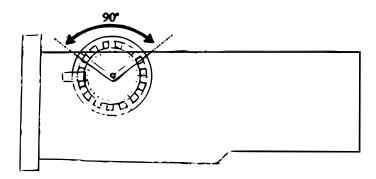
Guiding system for "position to velocity". The guiding has predefined hollow parts for the pin to slide in.
